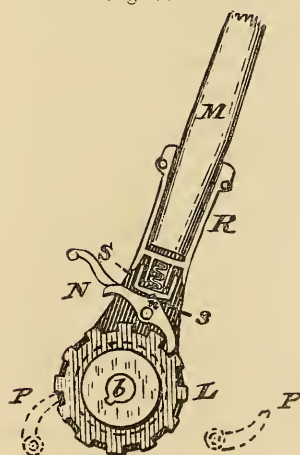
is a vertical section of the operating jack or gear-work. Fig. 77 represents, on a larger scale, a form of lever, pawl, and ratchet movement adapted for use with such apparatus, one inclosing-plate being removed.
